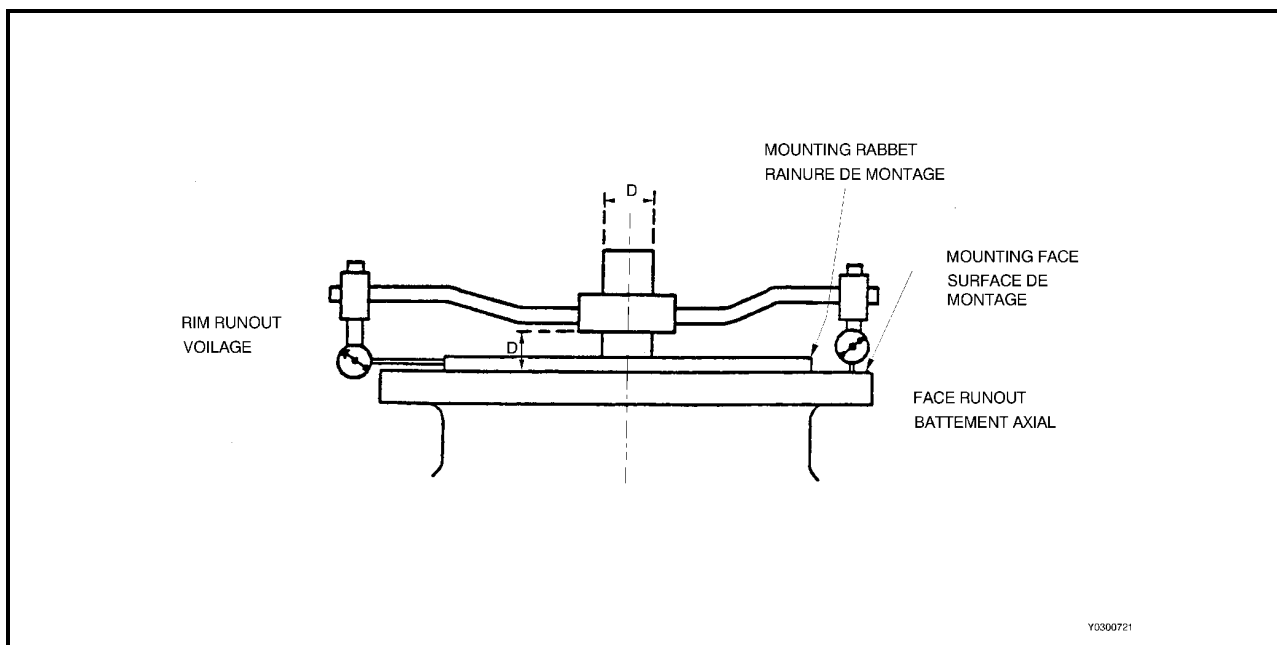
Measurement Location for Determining Face and Rim Runouts of Type C Face-Mounted and Type D Flange-Mounted Motors
